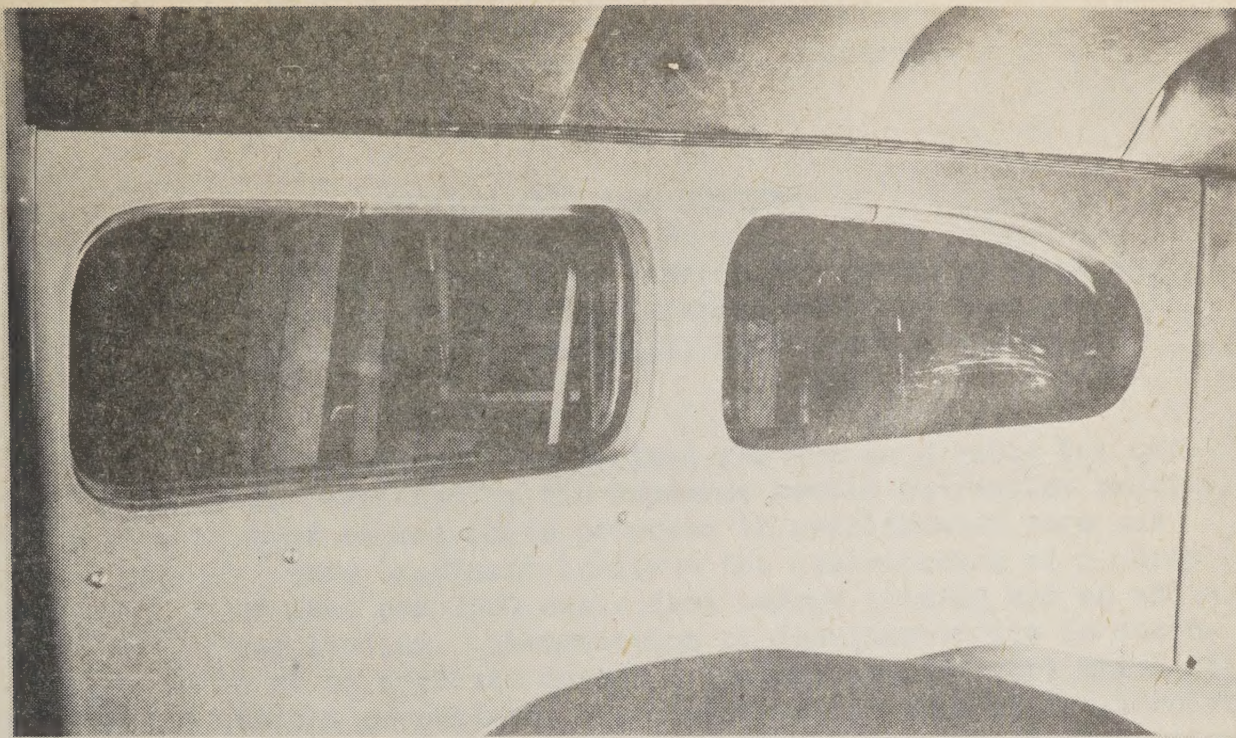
Interior view showing completed job with fiberboard wall in place and window opening trimmed to sill.
